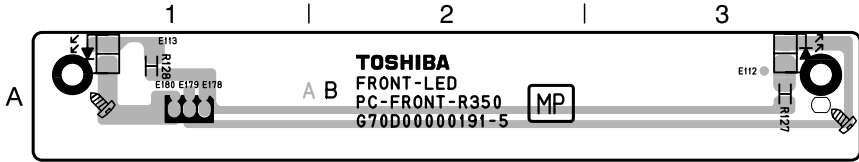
EU56 Front LED PC Broad (Bottom side)
